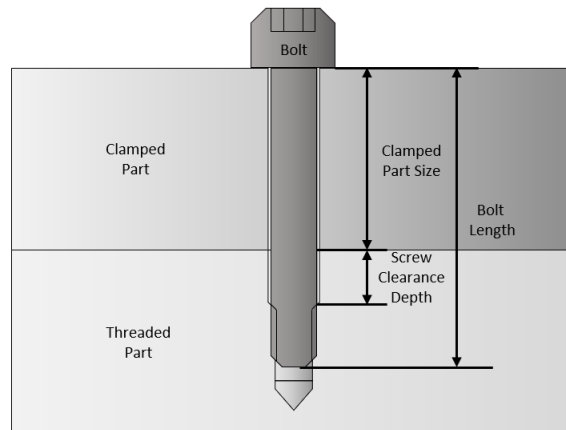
Schematic Overview of relevant Bolt Connection Tool Dimensions.
